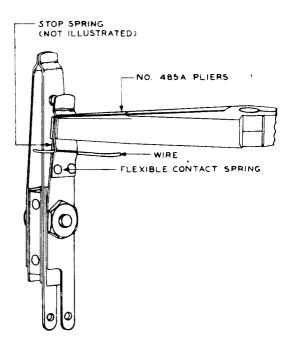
Method of Adjusting for Flexible Contact Spring Position
